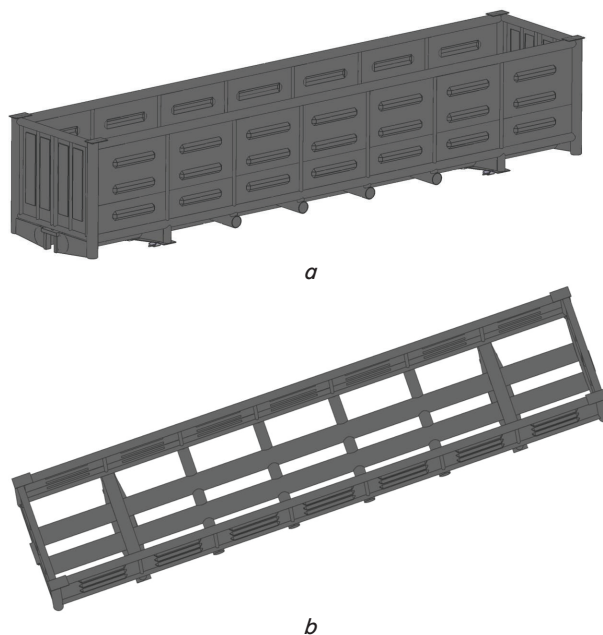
Bearing structure of an open-top wagon made with round pipes: *a* – side view; *b* – bottom view
